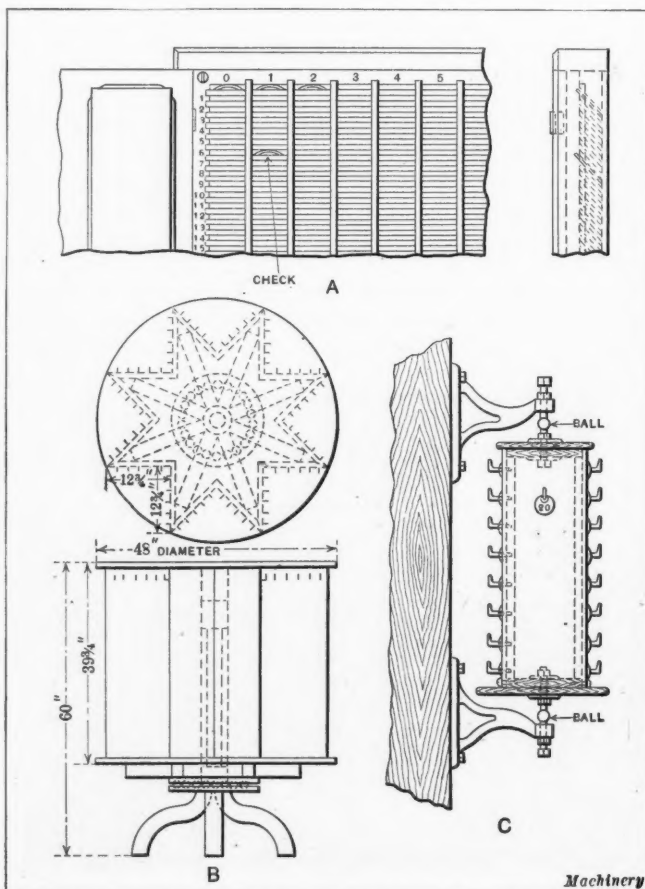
Three Forms of Check Boards or Cabinets for Tool Supply Rooms
